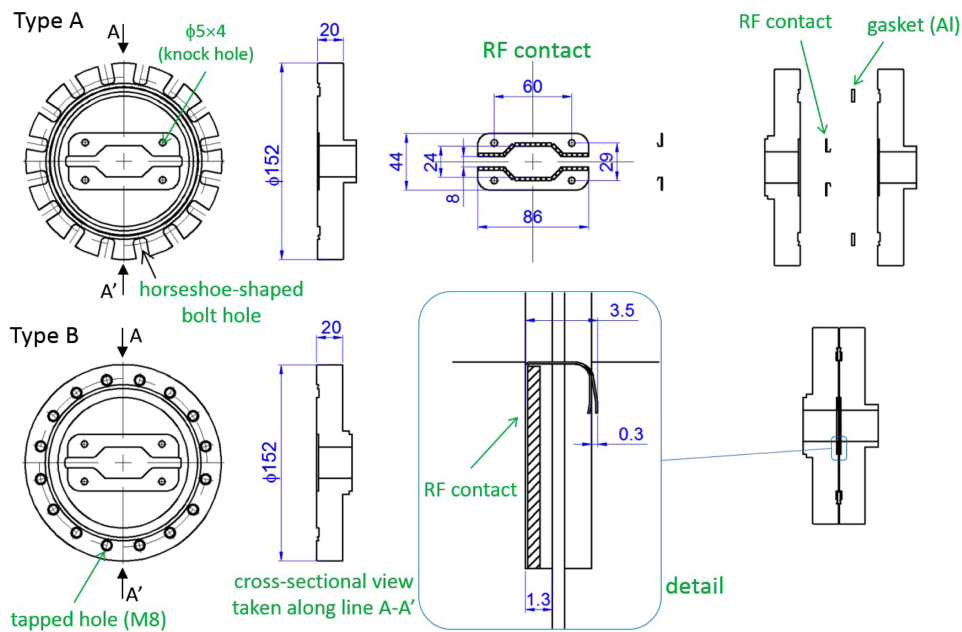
One set of special ConFlat flanges used for beam pipe connection in the arc sections for space saving.
